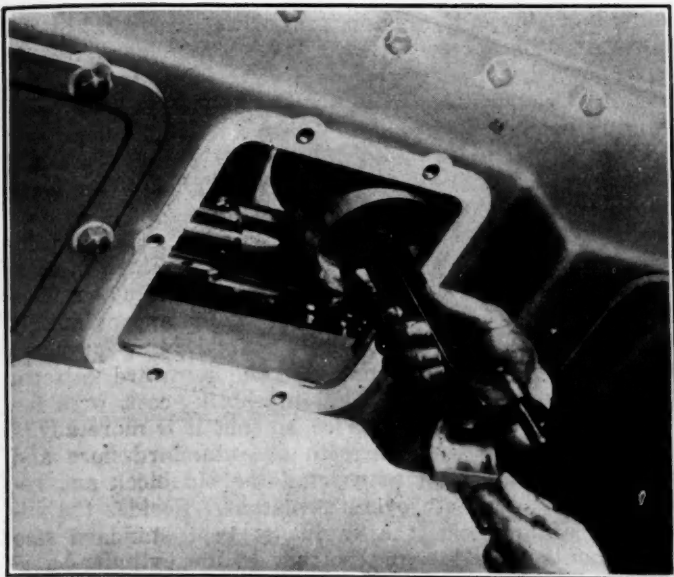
HAND-HOLES IN BASE OF CRANKCASE
